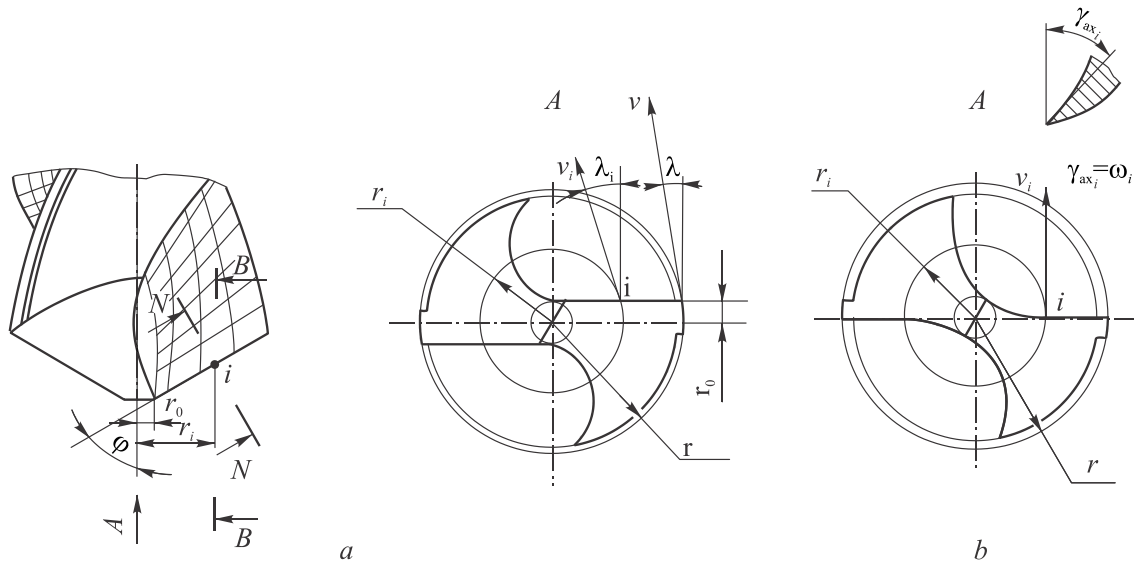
Twist drill geometry: (a) standard drill; (b) drill with lips in axial plane
